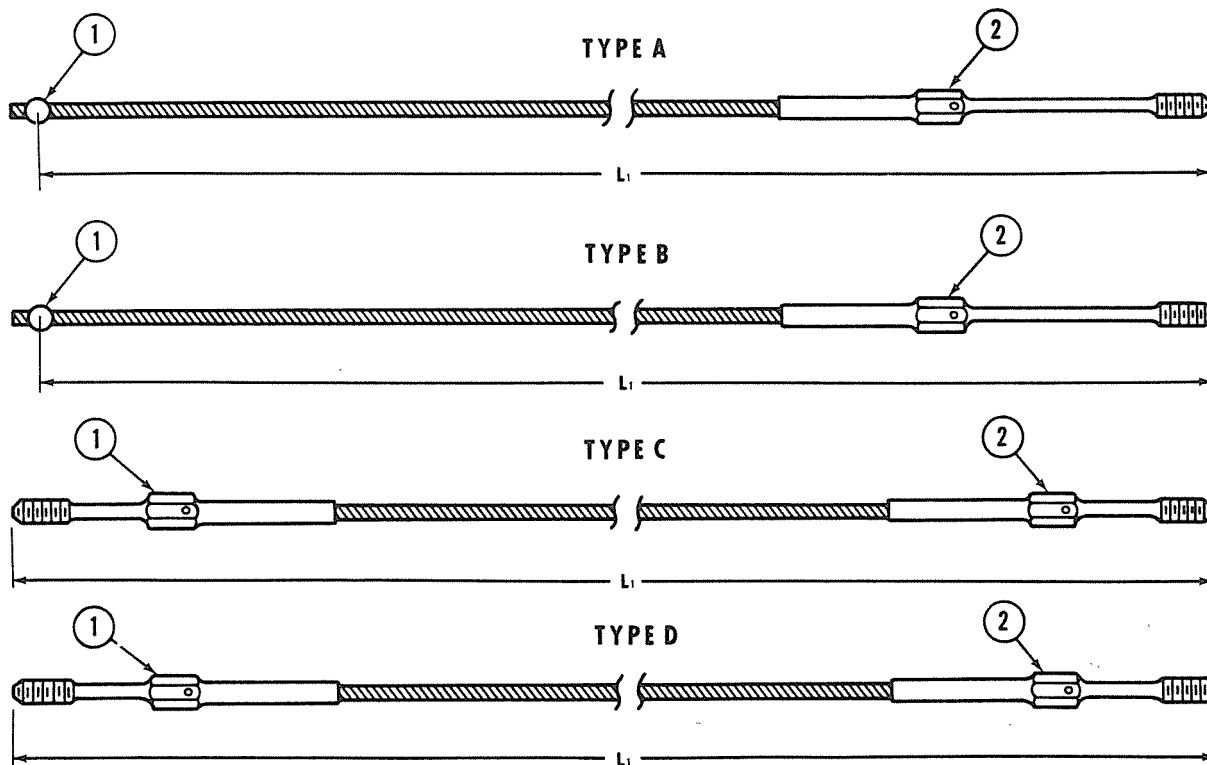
(Sheet 7 of 7 Sheets). Fuel Tank Selector Valve Control System – Cable Charts and Cable Assemblies
